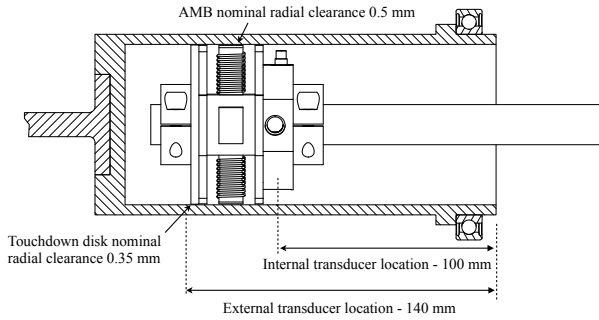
View showing half the rotor with a magnetic actuator in operational position
